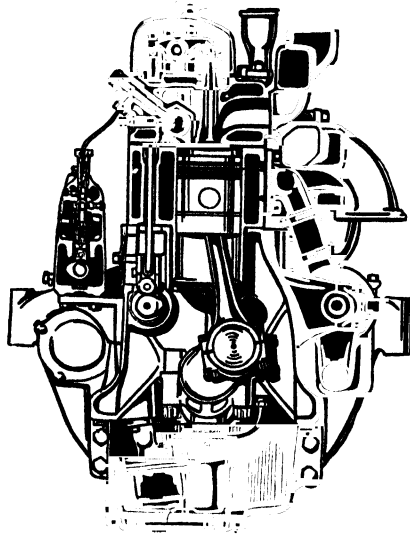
Century Comet Six (Waukesha) showing non-rocking, truncated cylinders, five-ring aluminum piston, single-piece combustion chamber insert, pintle-type injector, and glow plug for cold-weather starting. More than 85 per cent of the intake air is compressed into the combustion chamber. This is after the Ricardo design.
